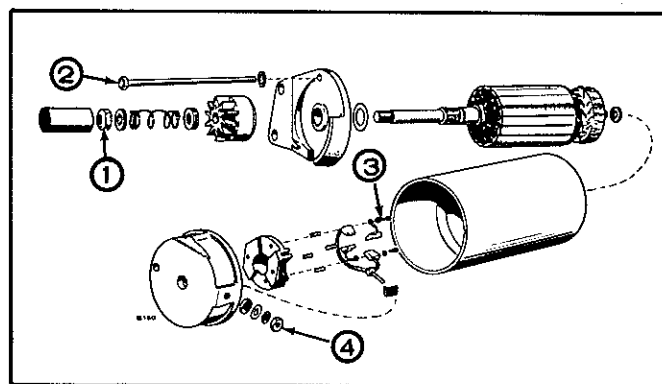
STARTER DISASSEMBLY (SPEC B)
